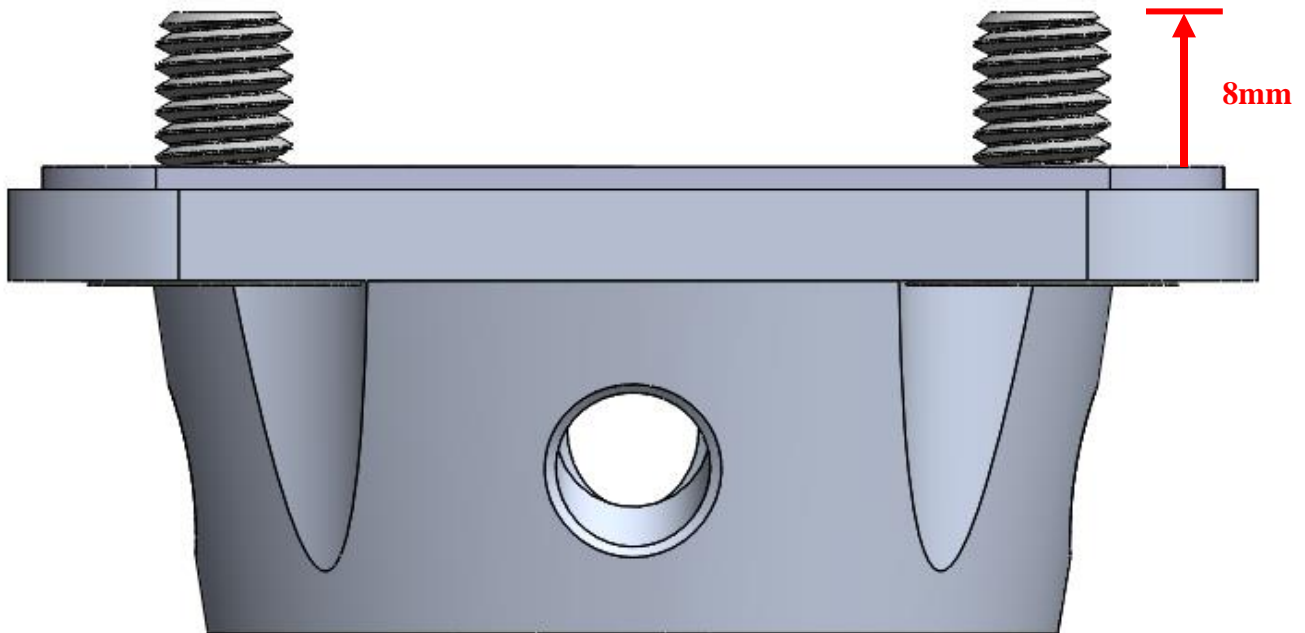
Figure C. Proper spacer thickness will limit the protruded section of the bolts to 8 mm.
